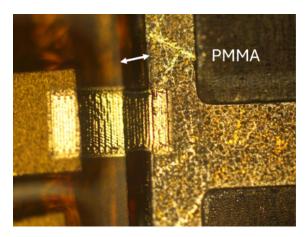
The PMMA ramps used at the die edge are also useful for smoothing out large steps in height at the PCB, including discontinuities at the die pocket edge and the PCB traces.
